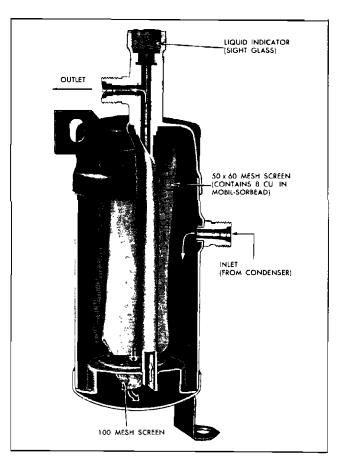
Cross Section of Tempest Receiver and Liquid Indicator Assembly
